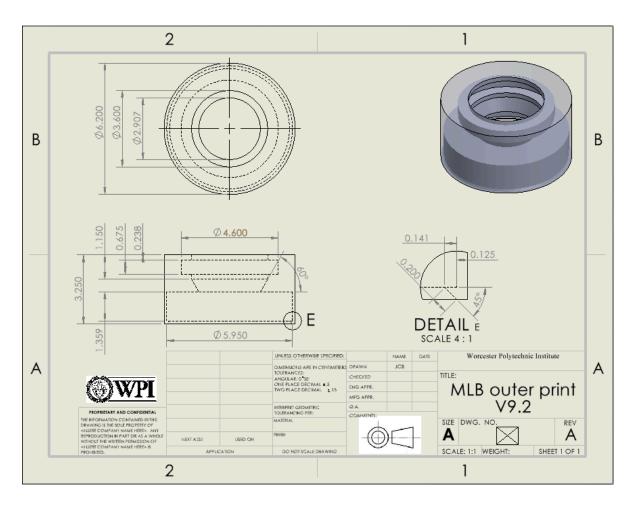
CAD Drawing schematic for the final design of the bottom half of the cap.
